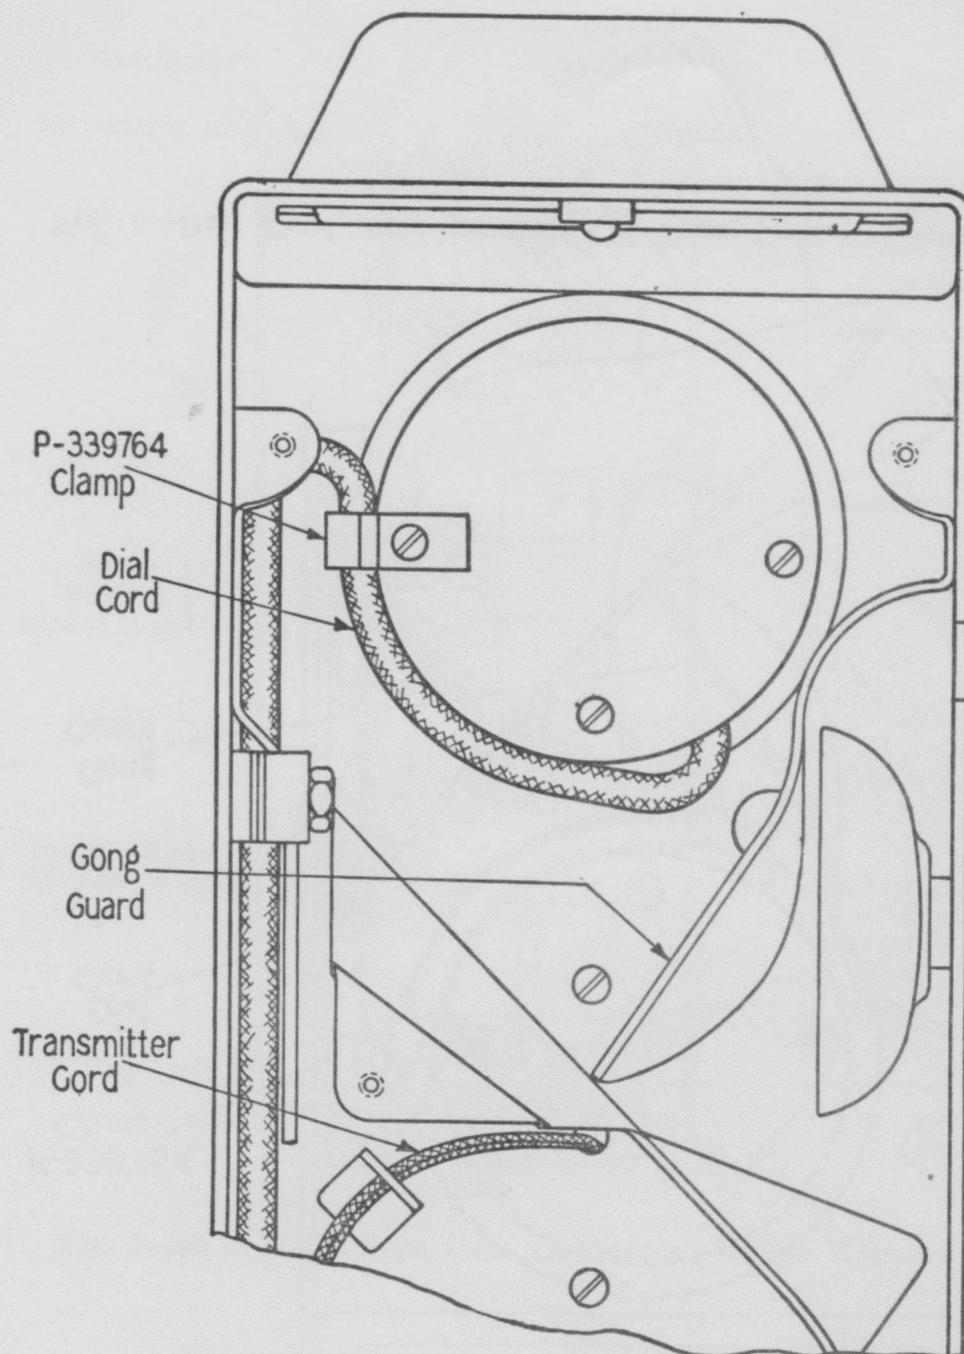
Dial and Transmitter Cord Arrangements—55, 155 and 166-Type Coin Collectors
